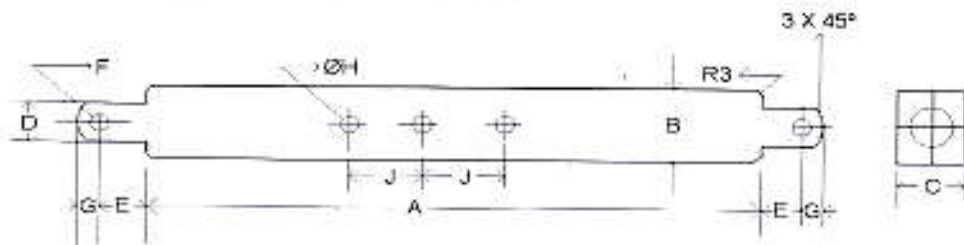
(b): DIMENSIONAL NOTATIONS FOR LINKAGE DRAWBAR
